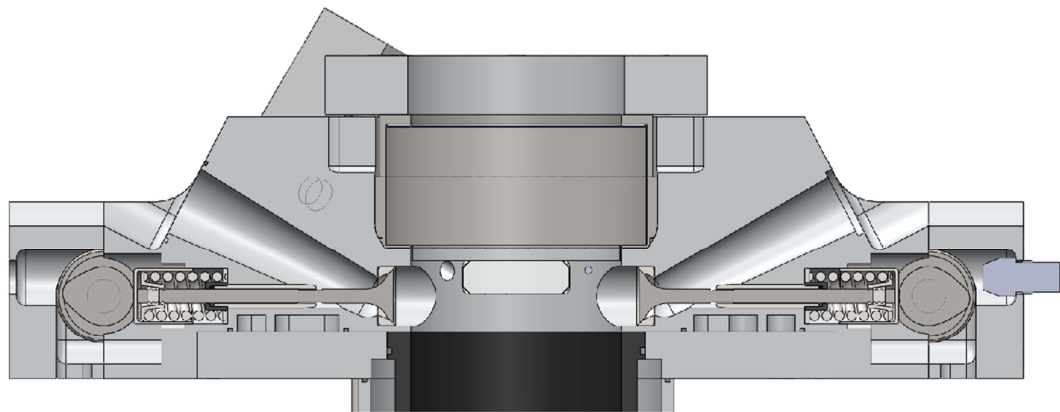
b. A cross-sectional view of the engine showing the inlet and exhaust port geometry.
